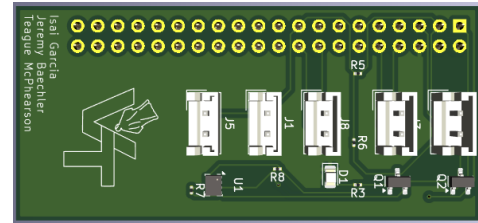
Custom PCB 3D View (Small PCB Adaptation)
